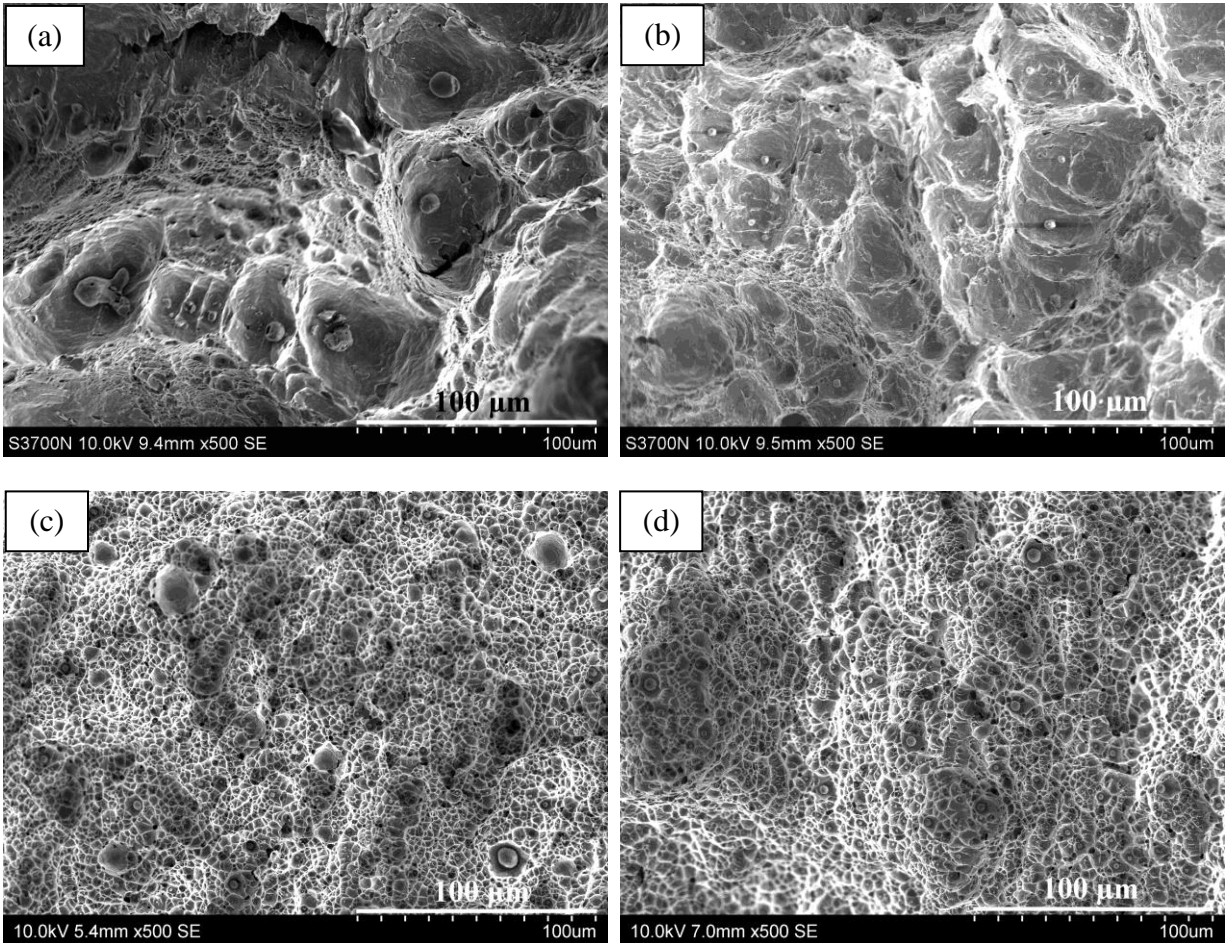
J_{Ic} fracture surfaces of the tested materials: (a) CA6NM steel, (b) 415 steel, (c) 410NiMo-AW and, (d) 410NiMo-HT
